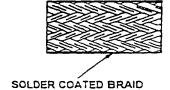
RF Cable Solder Method Repair (Sheet 3)
